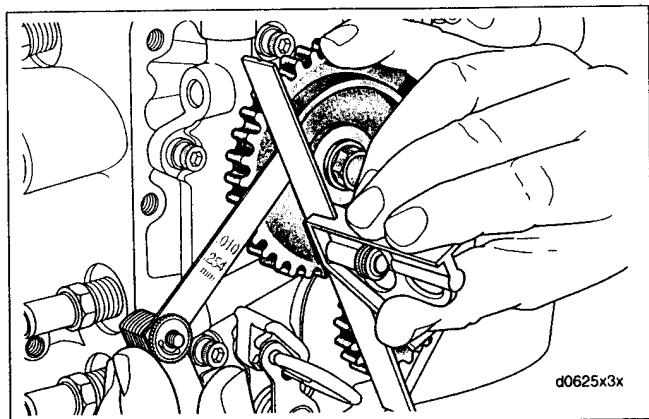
Check Alignment of Crank and Rear Cam Sprocket Faces
